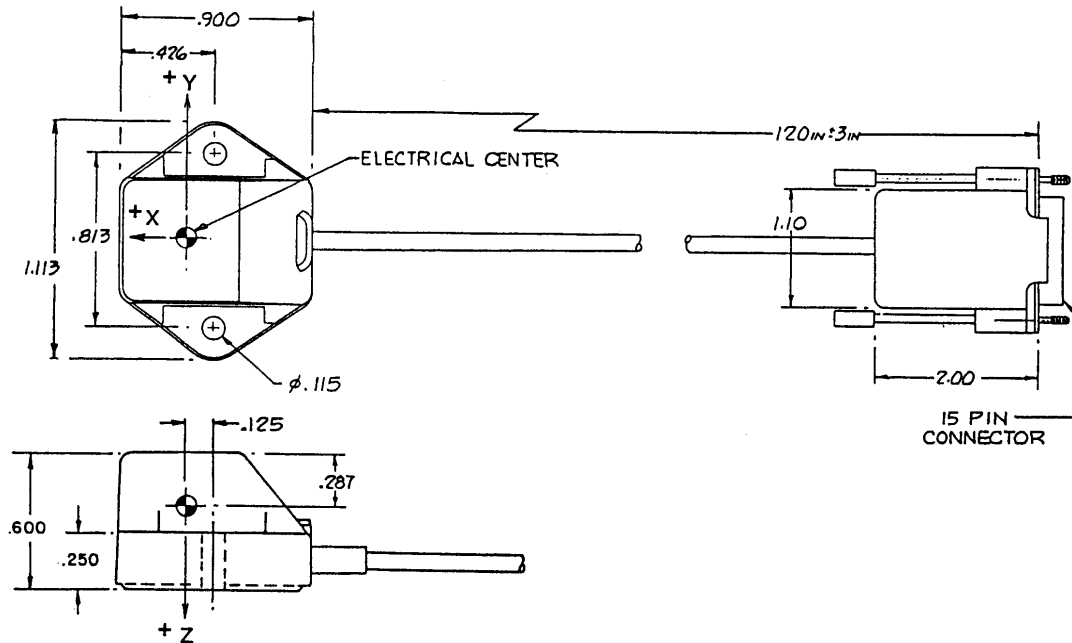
RX2 Receiver Dimensions (in Inches)
